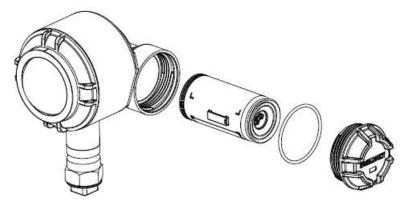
EXPLODED POWER MODULE VIEW
